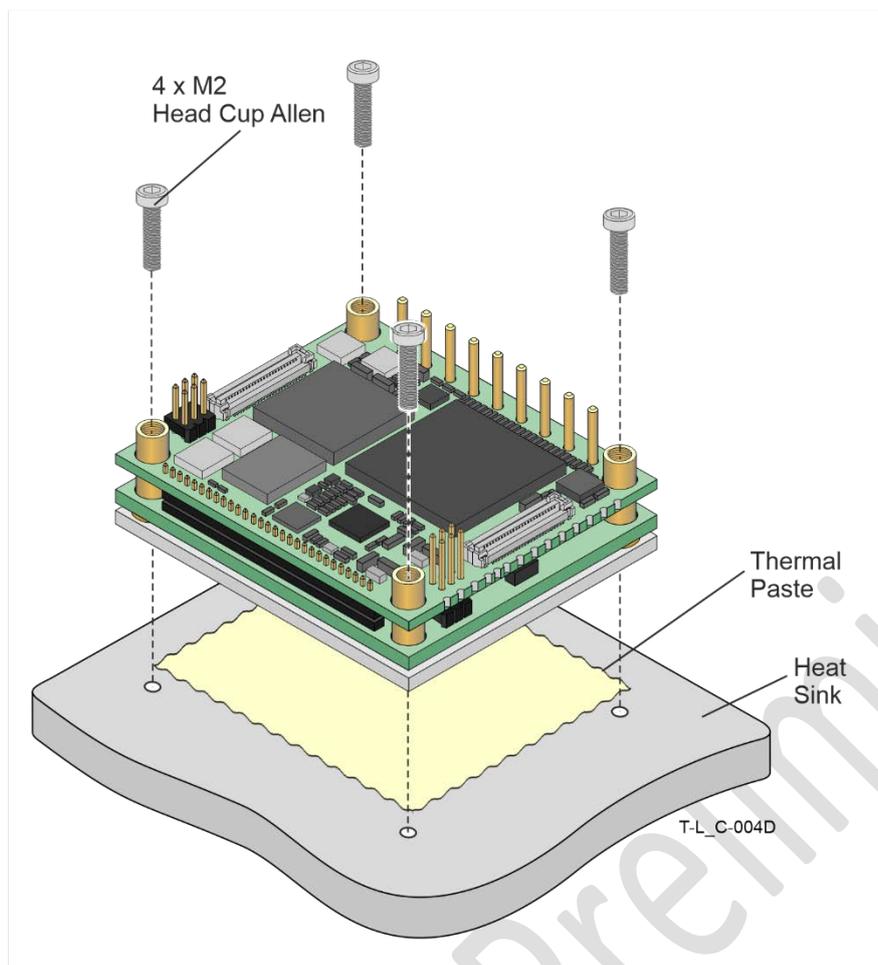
Mounting the Titanium Castanet onto the Heat Sink covered with Thermal Paste
